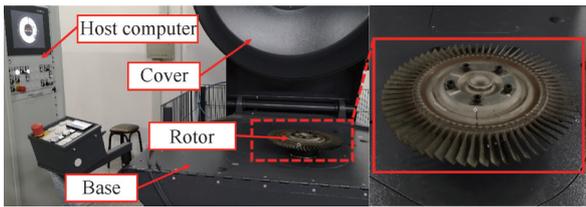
Experimental photograph of turbine rotor imbalance measurement using a vertical balancing machine
